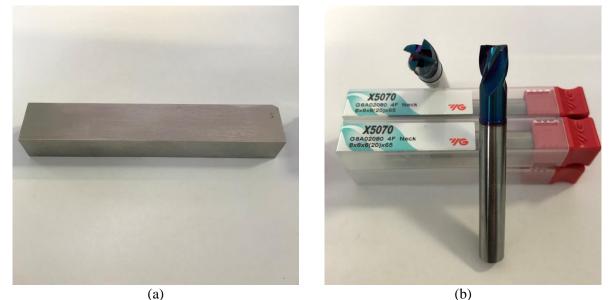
Materials: (a) The X153CrMoV12) Cold work steel, (b) G8A02080 X5070 End mills
